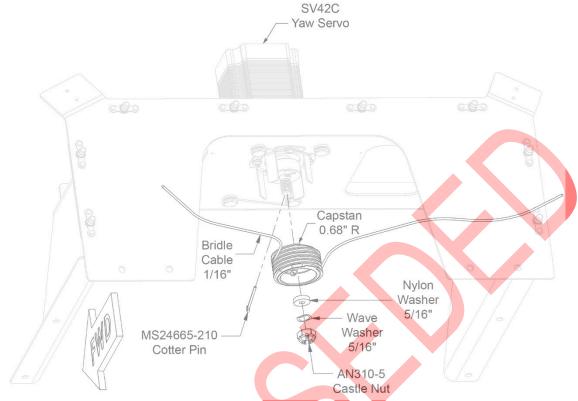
Removing Bridle Cable and Capstan from Yaw Servo
